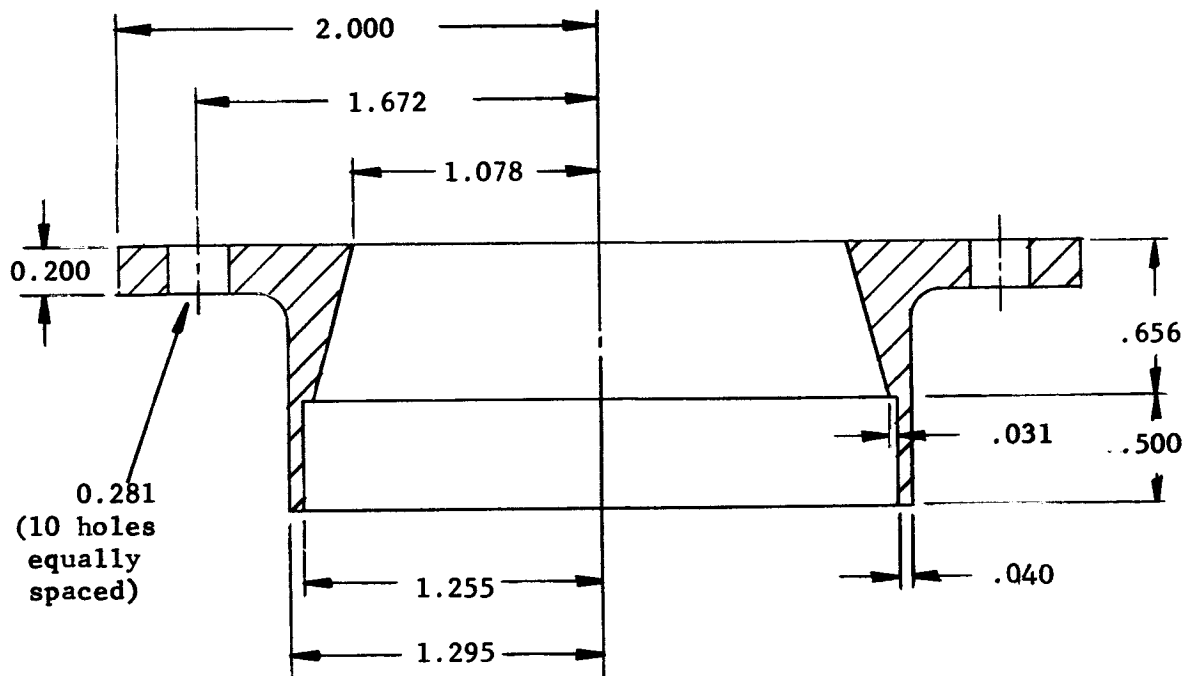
NBS Flange Dimensions (Ref. 1)
